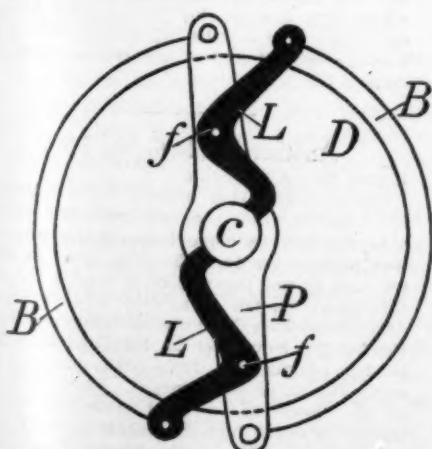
DRAWING SHOWING MECHANISM OF MORS CLUTCH.
